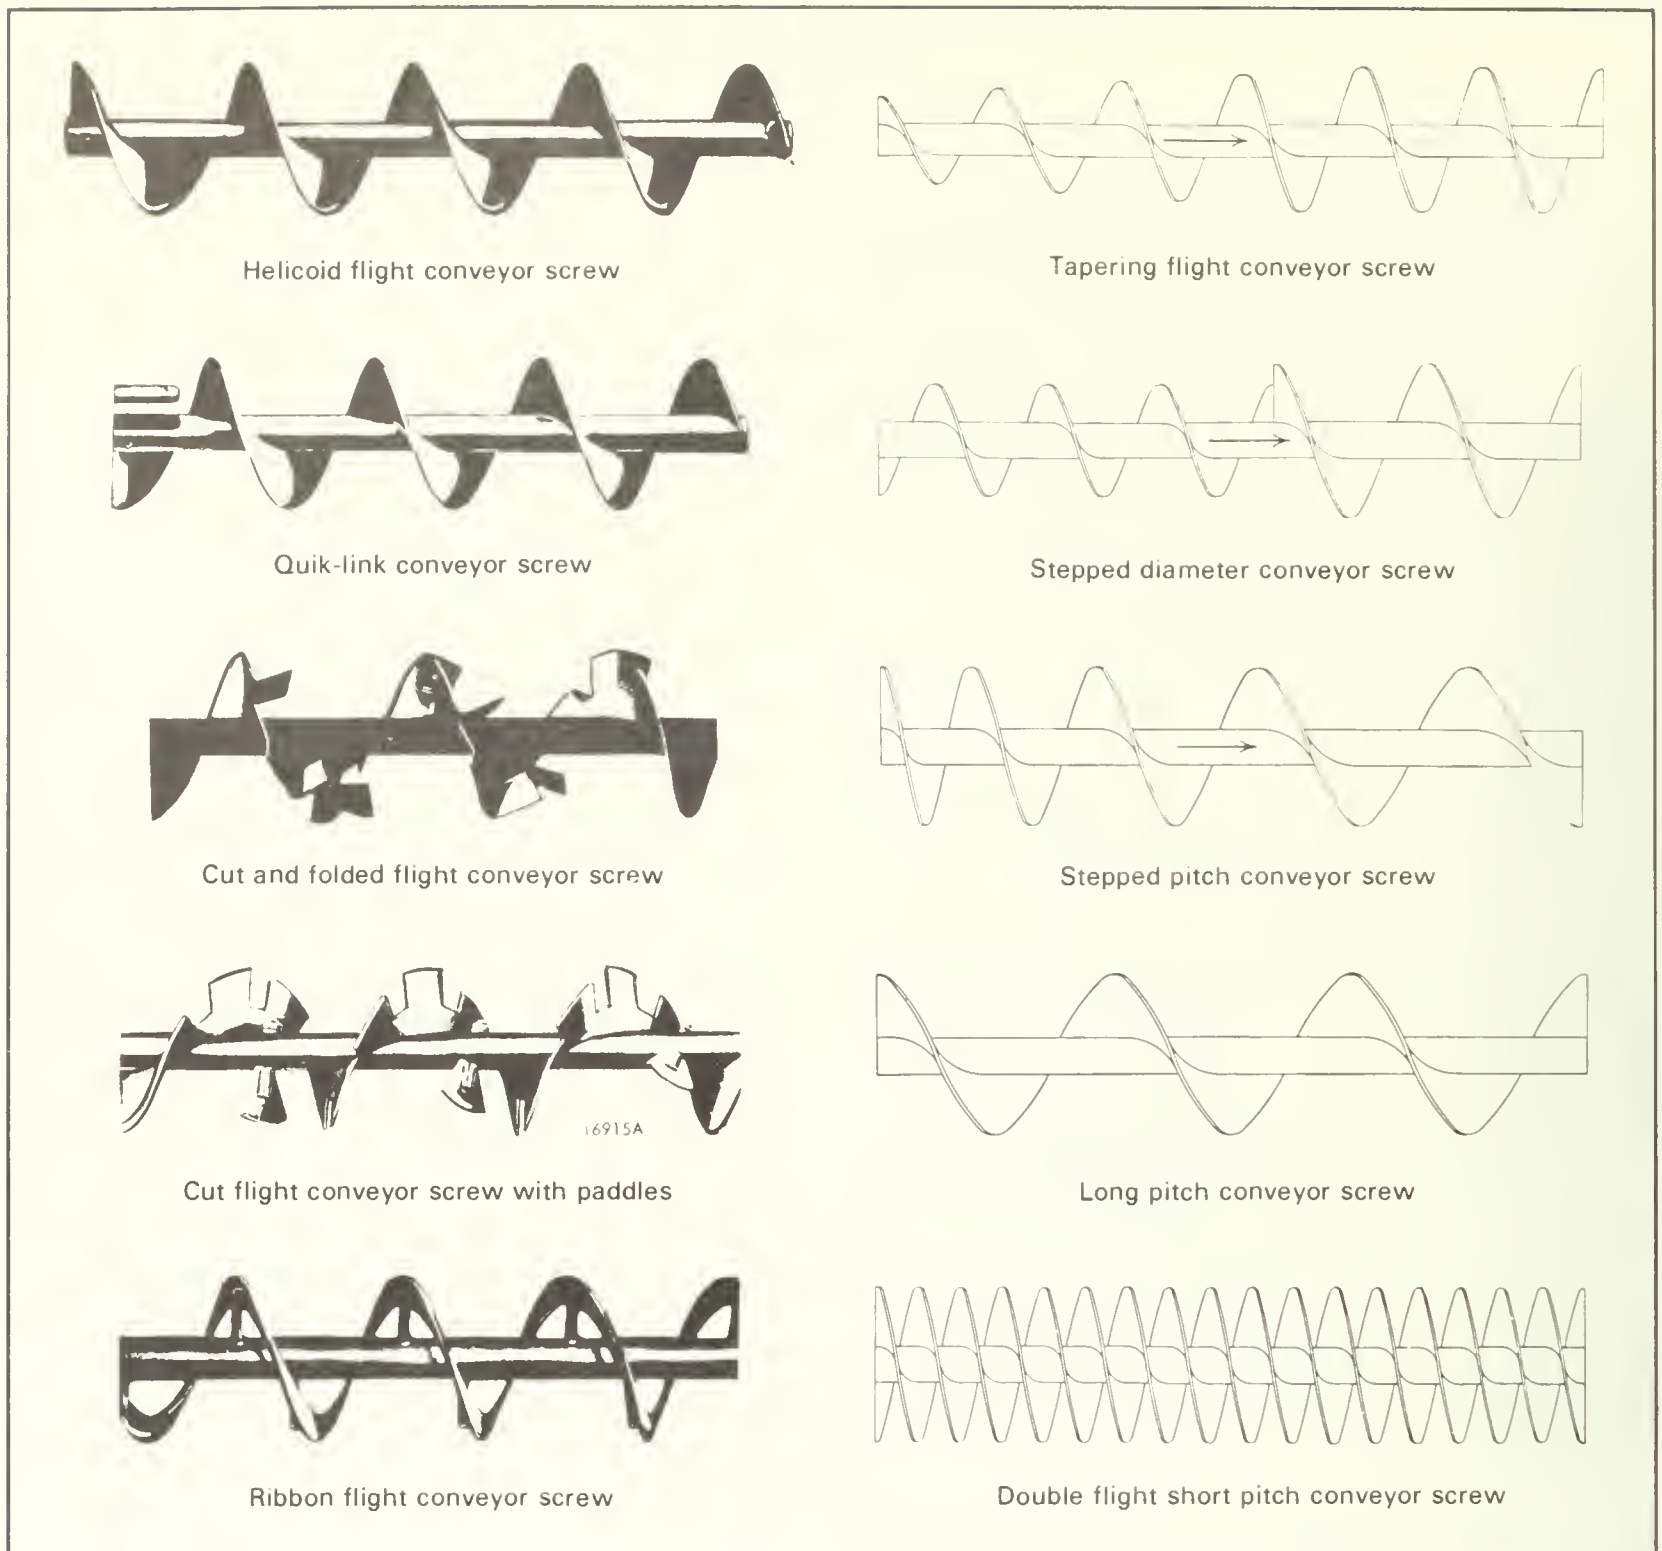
Examples of conveyor screws (adapted from Link-belt Screw Conveyors and Screw Feeders - FMC.)
